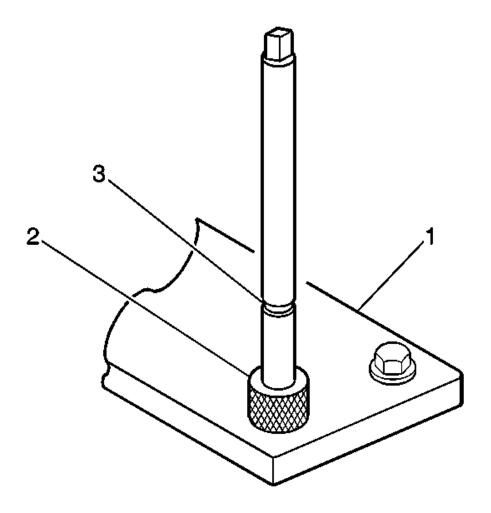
Fixture Plate, Drill Bushing And Tool Marking Courtesy of GENERAL MOTORS COMPANY
